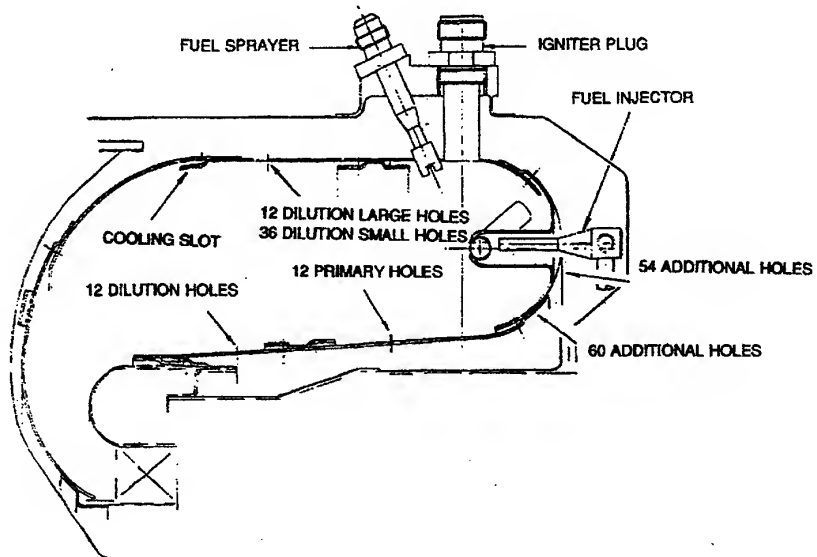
Schematic drawing of single annular turboprop engine reverse-flow combustor.
